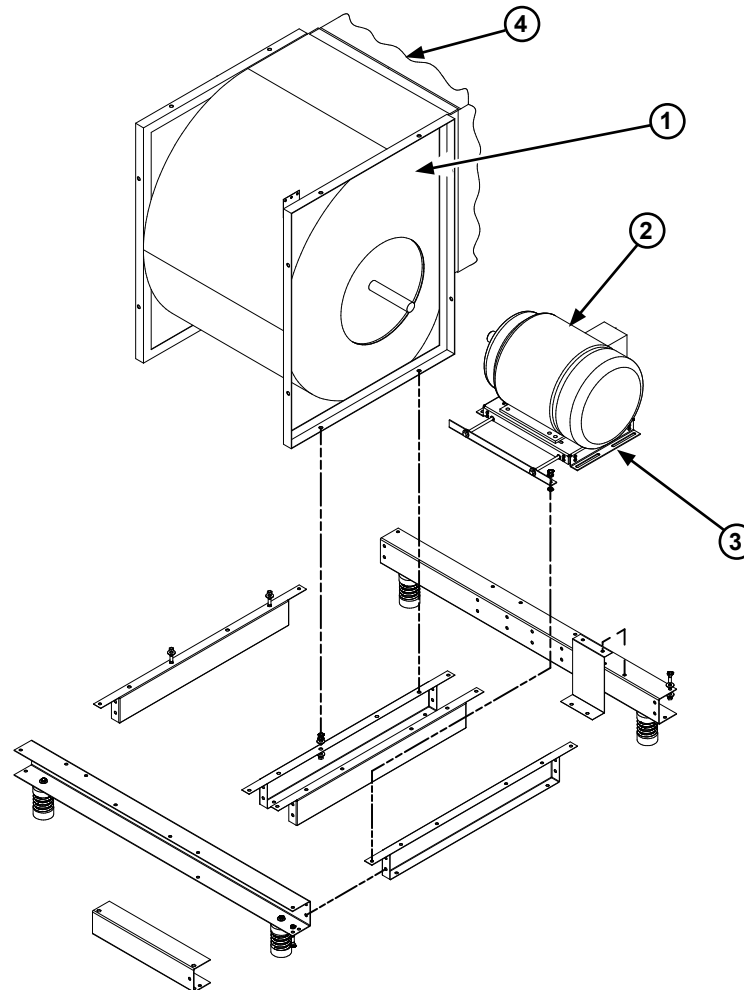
SUPPLY FANS, BLOWER ASSEMBLY AND MOUNTING PLATE
